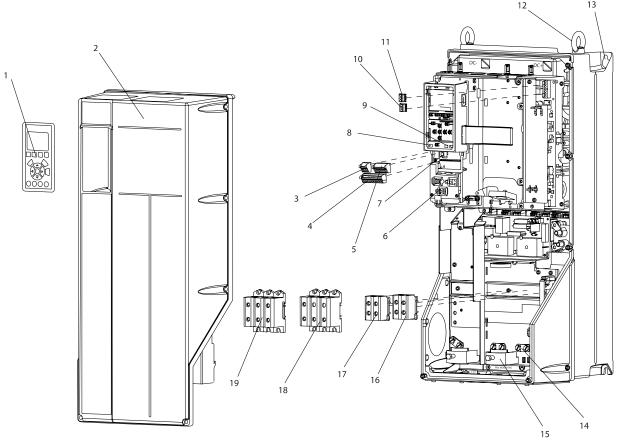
Exploded View B and C Sizes, IP55/66
